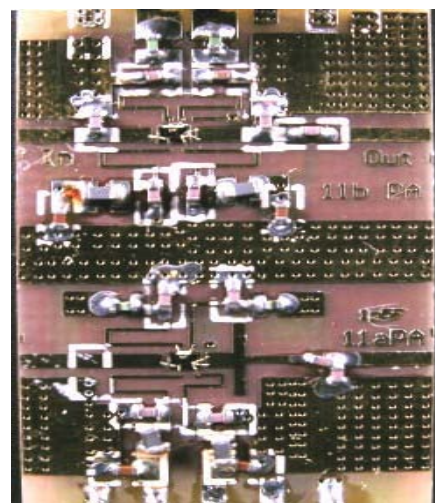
Photograph of the dual-band WLAN PA module evaluation PCB
